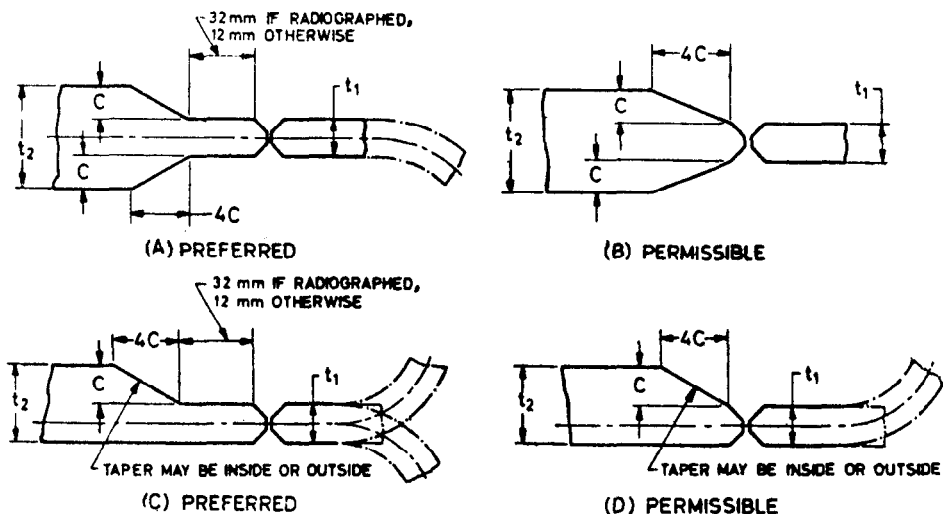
BUTT WELDING PLATES OF UNEQUAL THICKNESS
